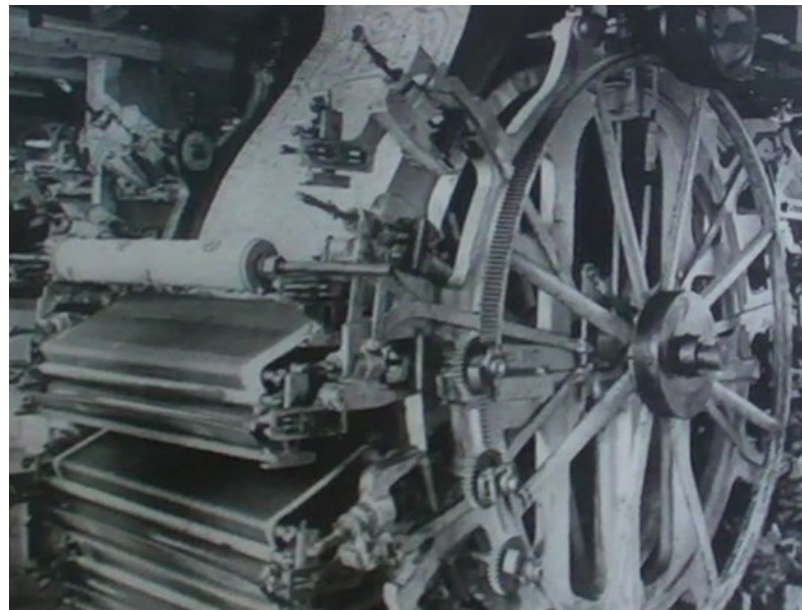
Surface Roller Machine at the Printworks, 1850s (Photograph courtesy of Printworks)
